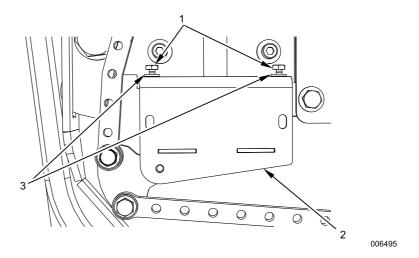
Upper Hex Bolt Removal from Inner Shaft Lockplate Bracket.
